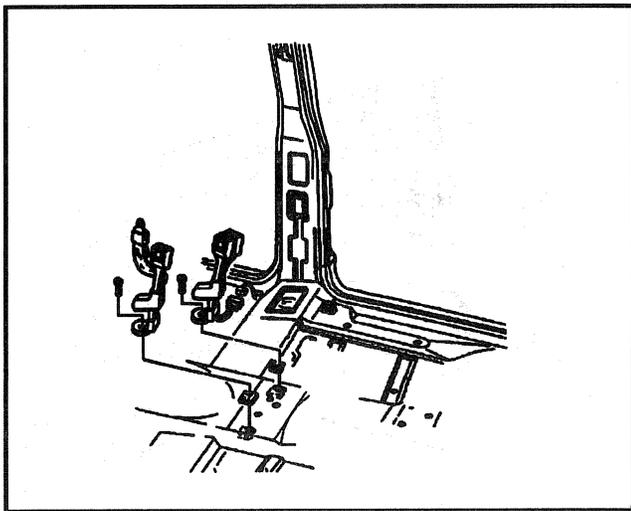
Front Seat Belt Attachments (Suburban and Crew Cab)
